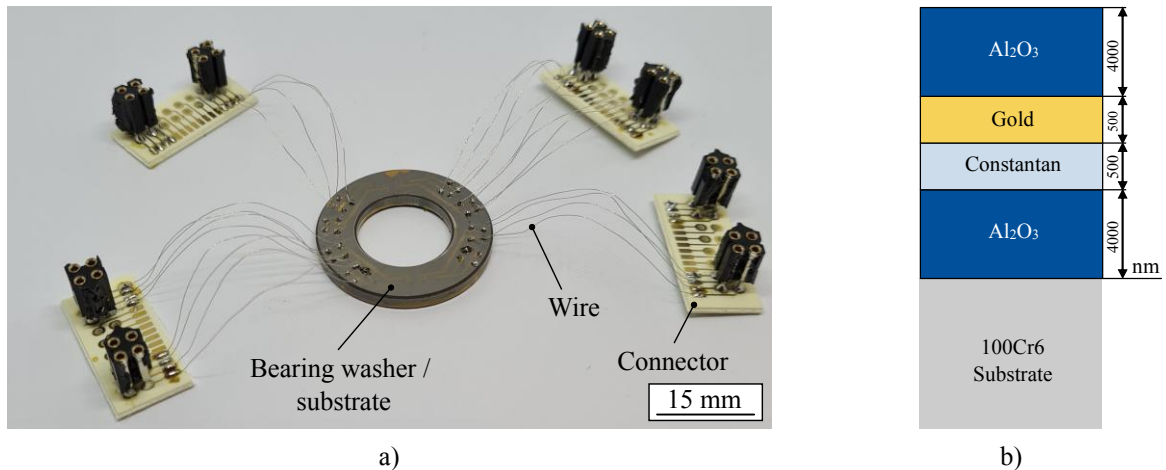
Overview of the produced sample: (a) Bearing washer with contacted thin-film sensors. (b) Schematic section view of the layer system of a trace (unscaled).
